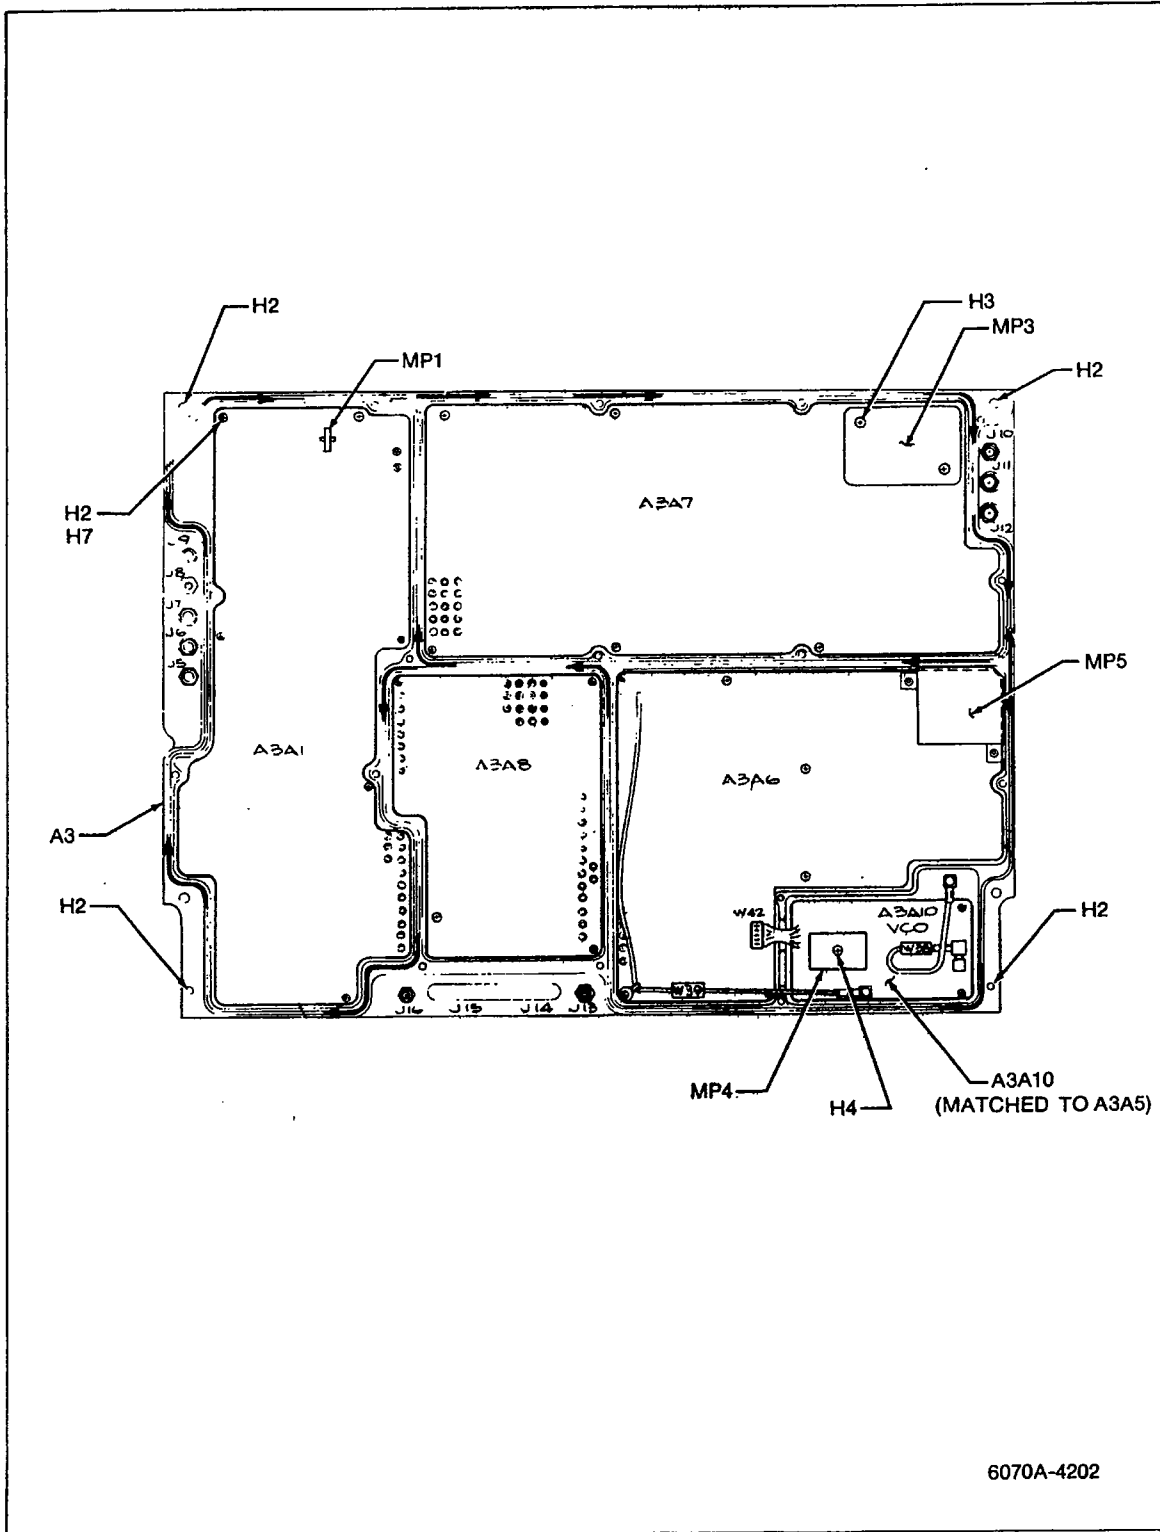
A3 Synthesizer Module Assembly (cont)
